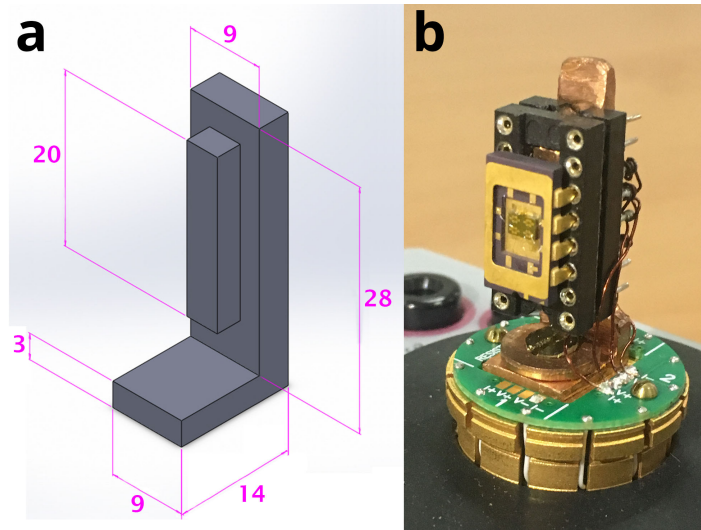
a) Technical drawing of the part for modification of PPMS puck (dimensions given in millimeters) and b) in-plane chip carrier holder mounted on PPMS puck
